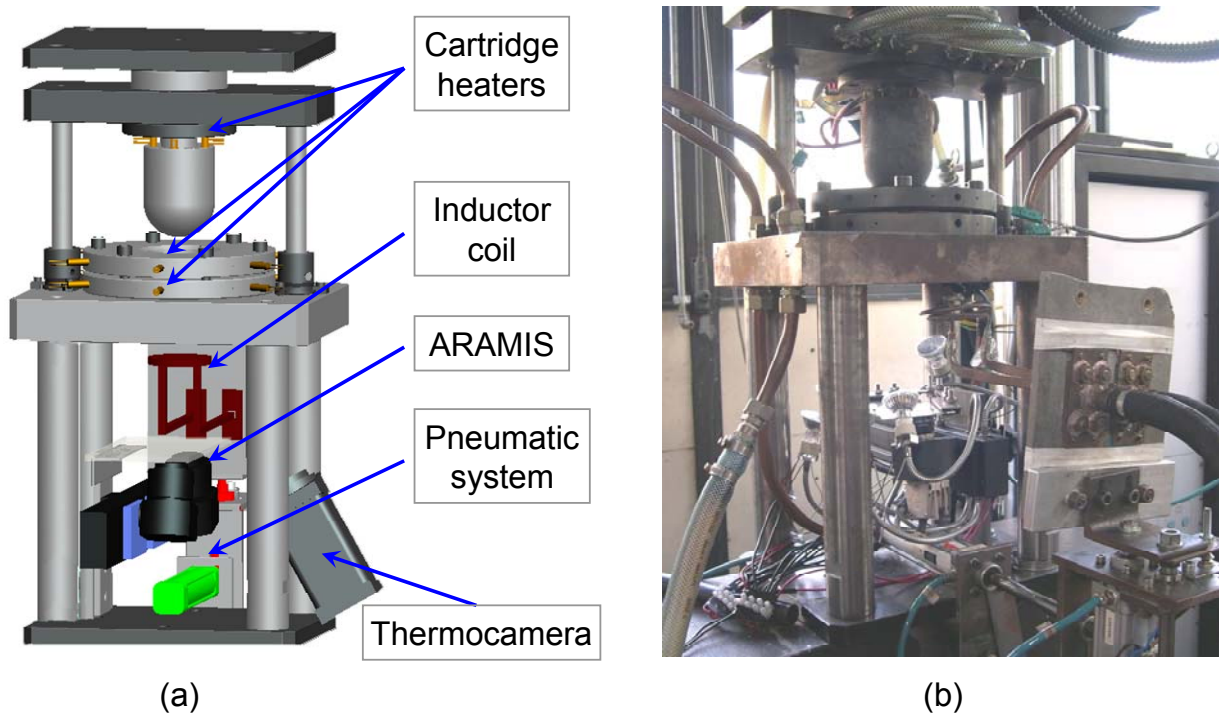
CAD drawing of the Nakazima device (a) and physical prototype (b)
